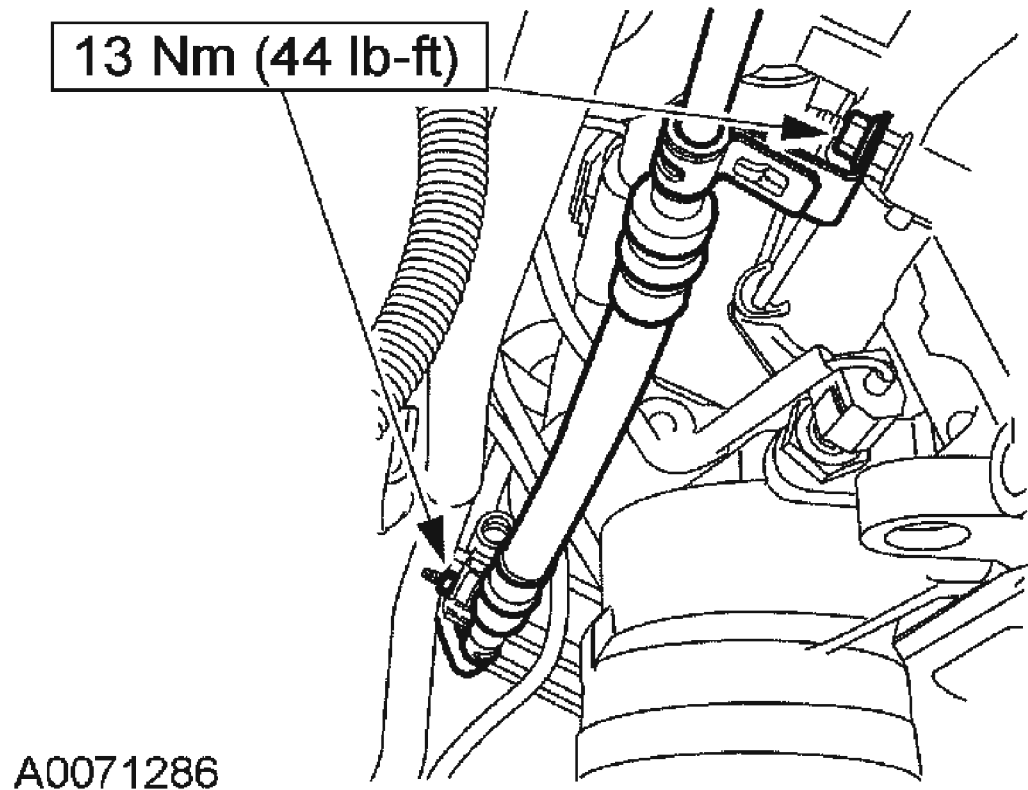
Installing Power Steering Pressure Tube Brackets And Nuts
